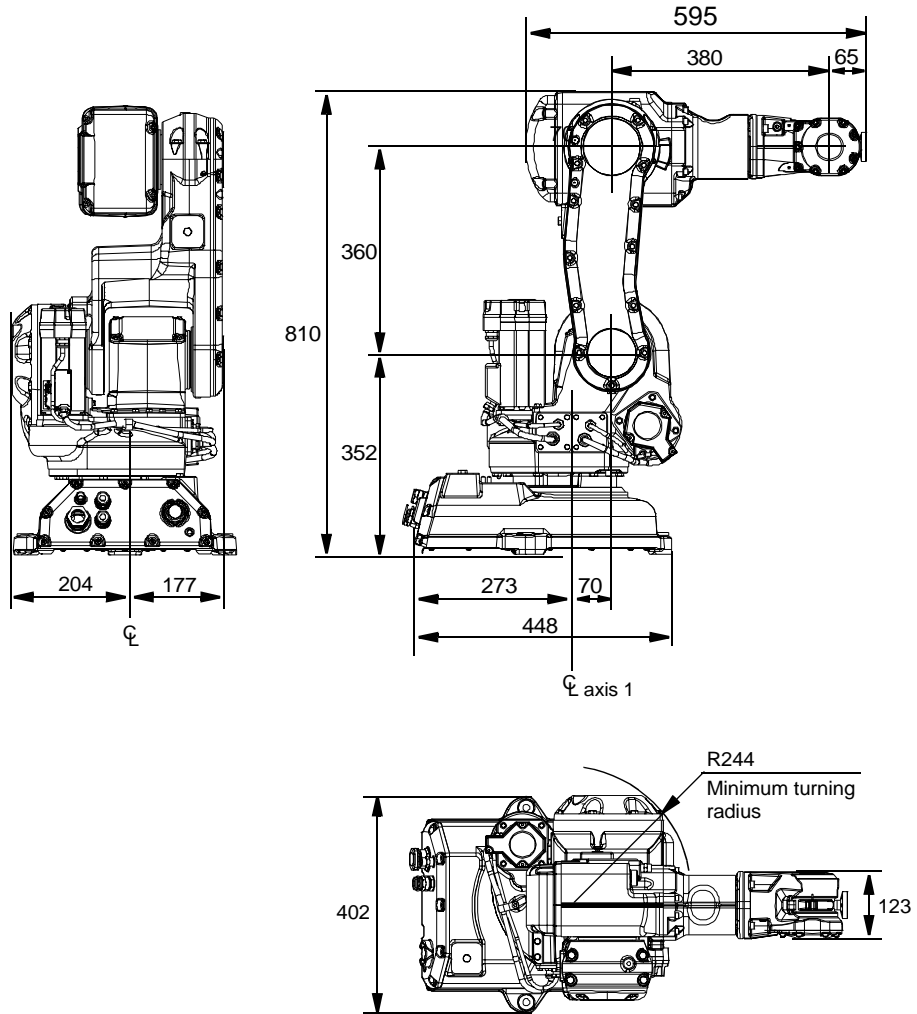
View of the manipulator from the back, side and above (dimensions in mm).
